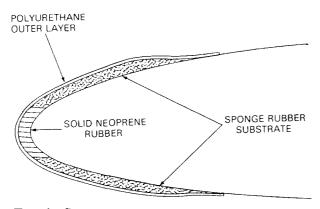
Section through ice-shedding coating on leading edge of helicopter rotor blade
